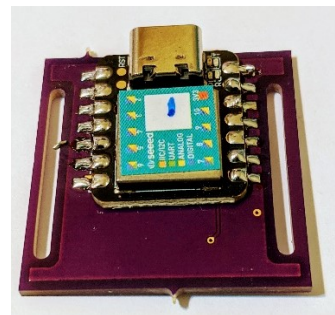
Fabricated Prototype PCBA for low-cost contact thermometer (top view).
